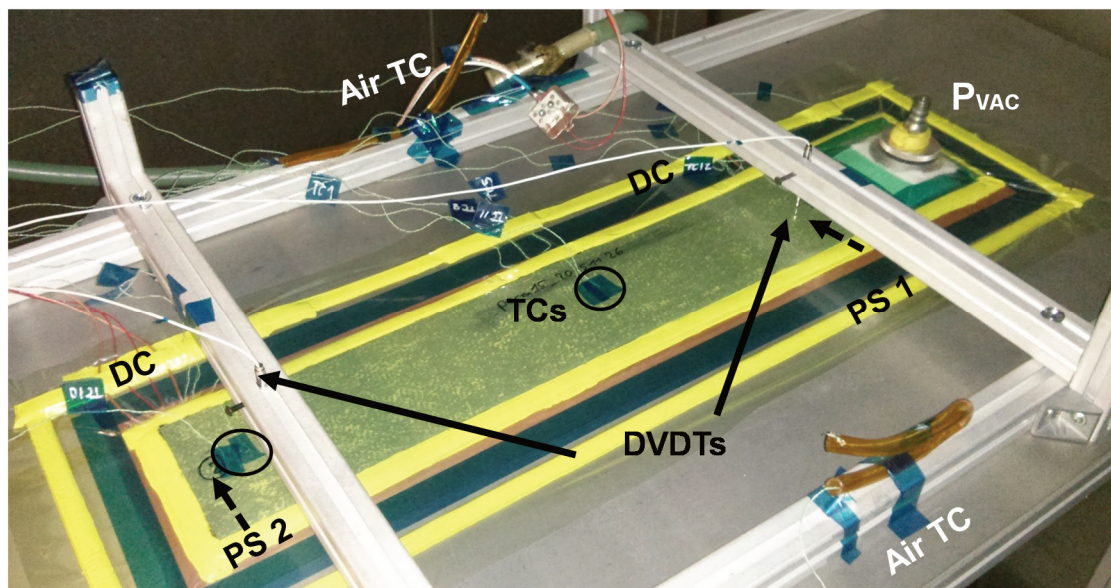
Fully instrumented demonstrator part before undergoing OoA processing
